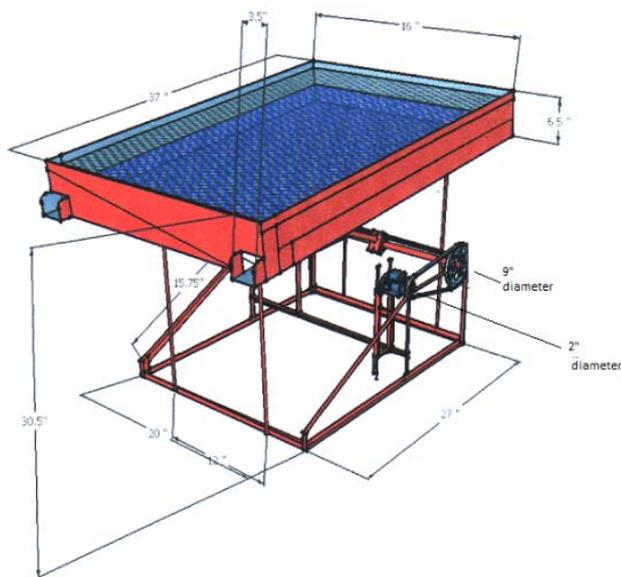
Design and Dimensions of the Remote Controlled Sand and Gravel Sorter Machine
